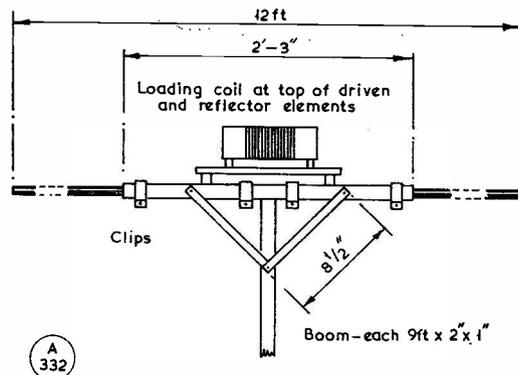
Plan view of boom-ends and their supports in the G3KBE Mini-Quad design. Sections 1-in. cube are cut out of the top end of the booms so that they are flush with the 27-in. hardwood pieces. The canes are secured under the hardwood.
